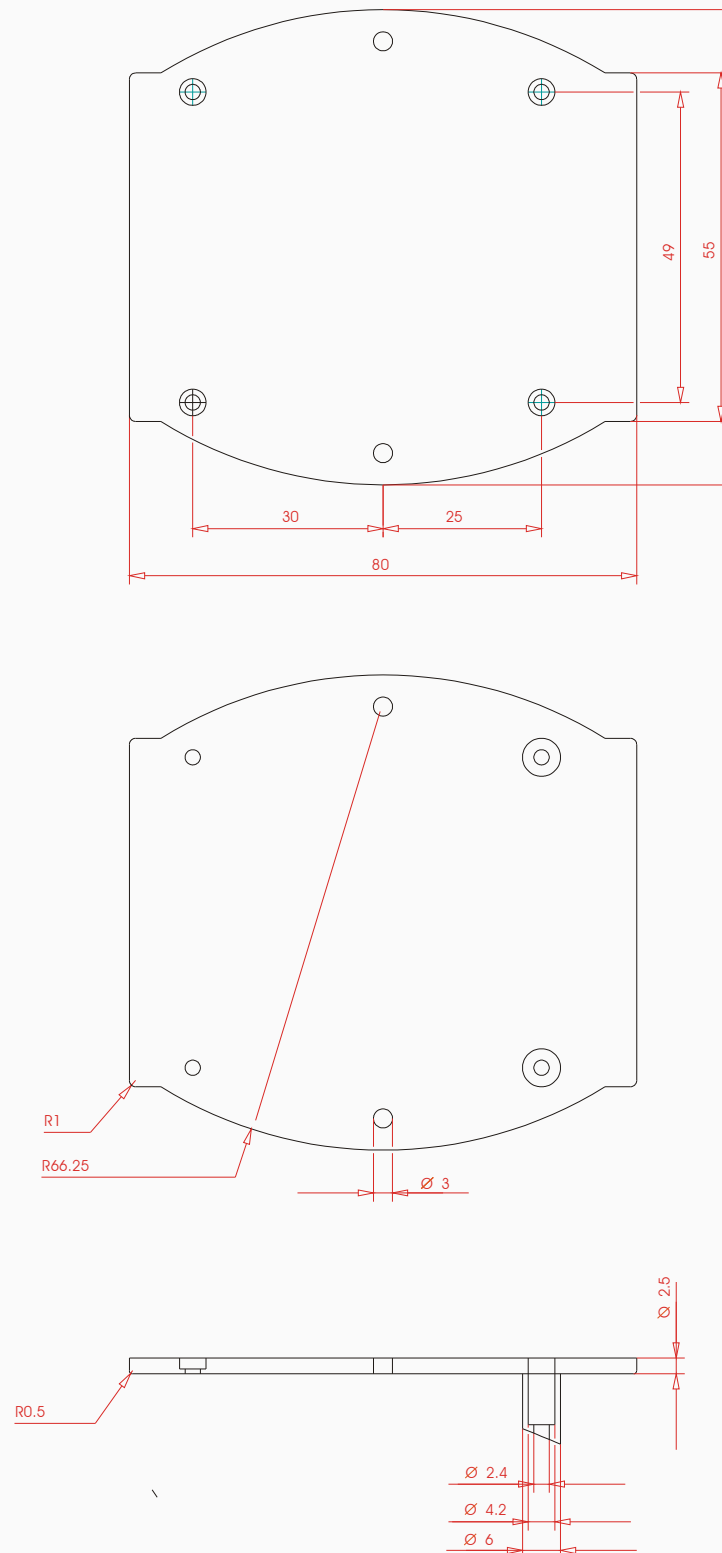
Mounting cradle of the STEPPII-55/56-LT
